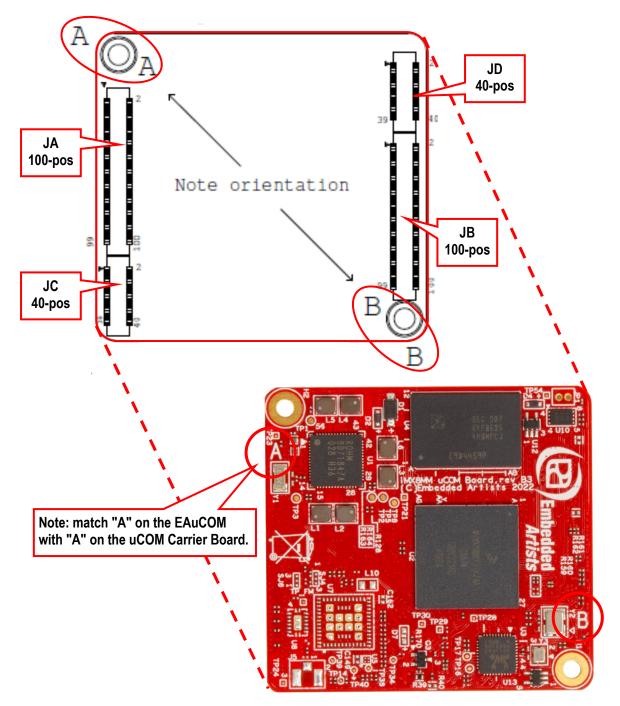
Orientation of uCOM Board when Mounting on Carrier Board
